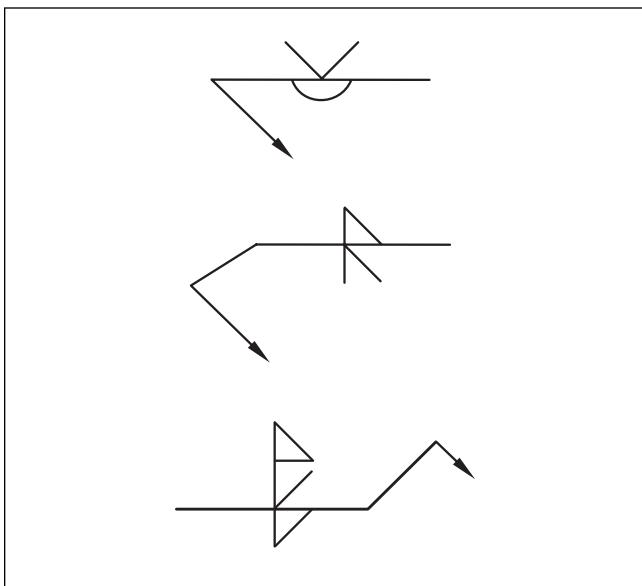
Representative Welding Symbols Indicating Only One Side of the Joint Is to Have a Special Edge Shape
